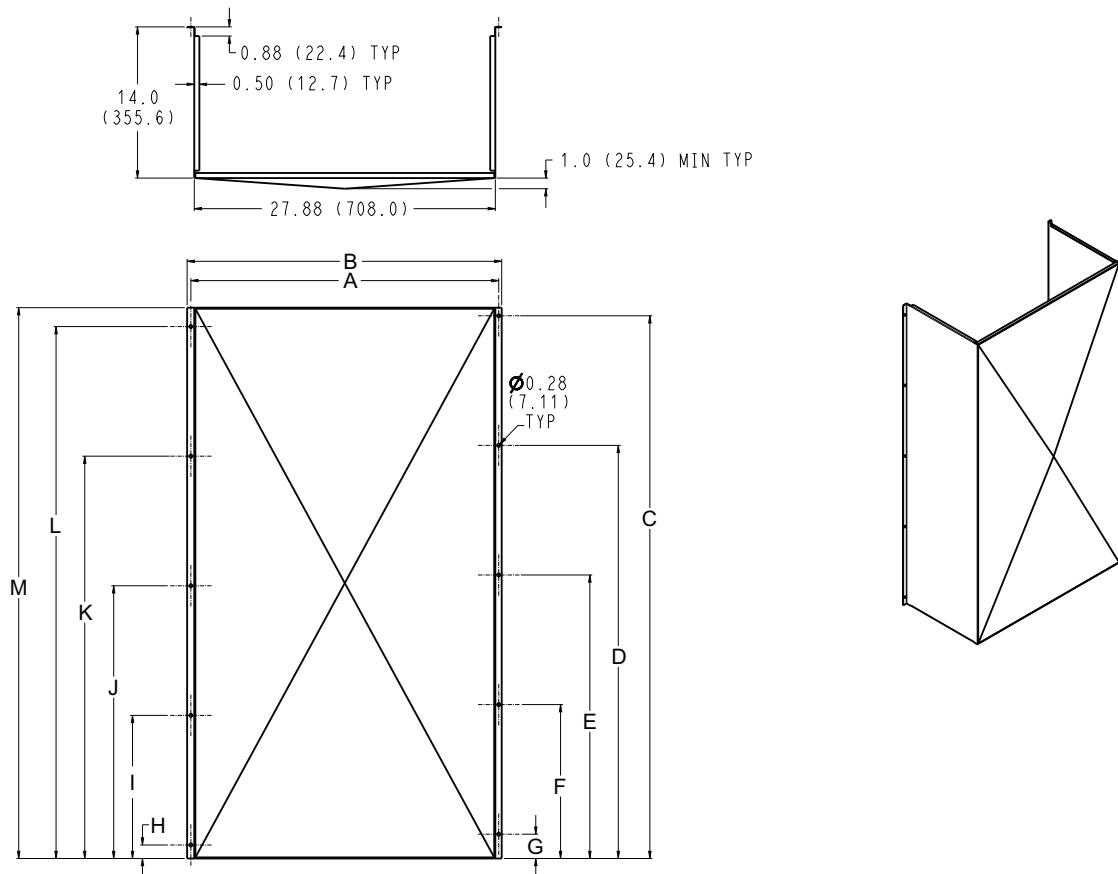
Cabinet C — Side Baffle F (Front/Top View)
